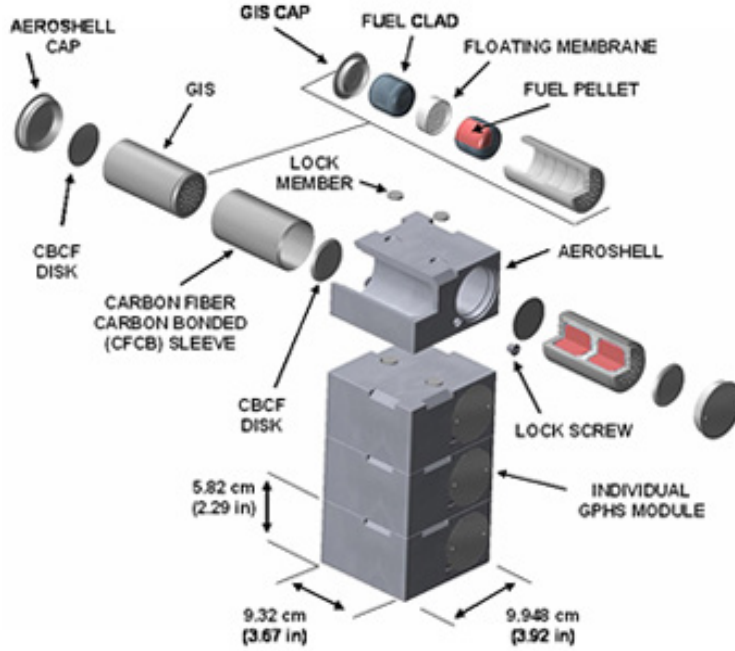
GPHS block assembly drawing (Ref. 18).
